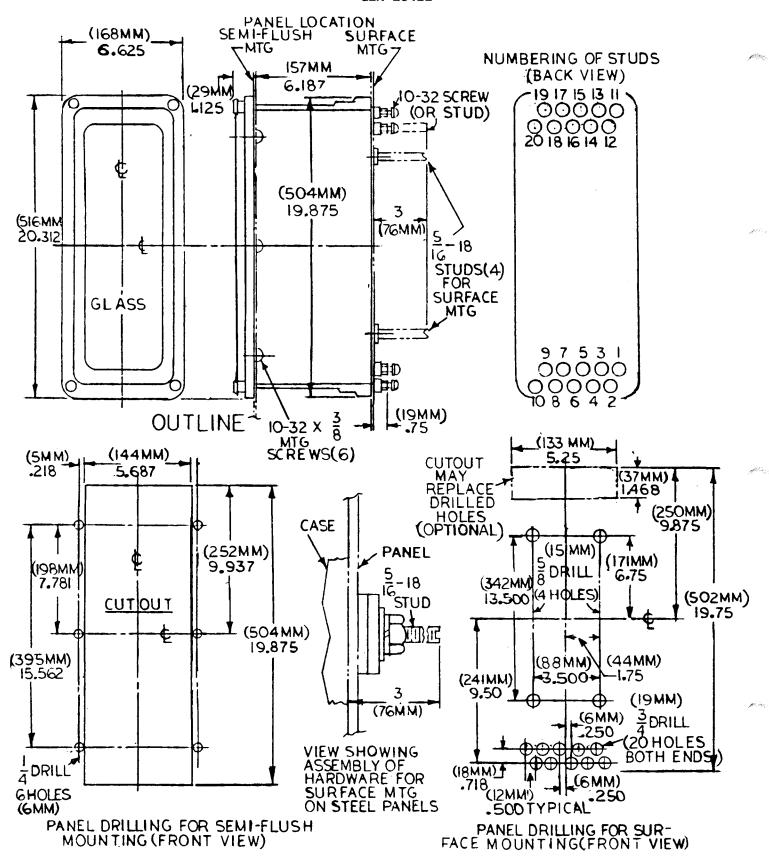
(K-6209276-3) Outline and Panel Drilling Dimensions for the GCXG53A Relay
